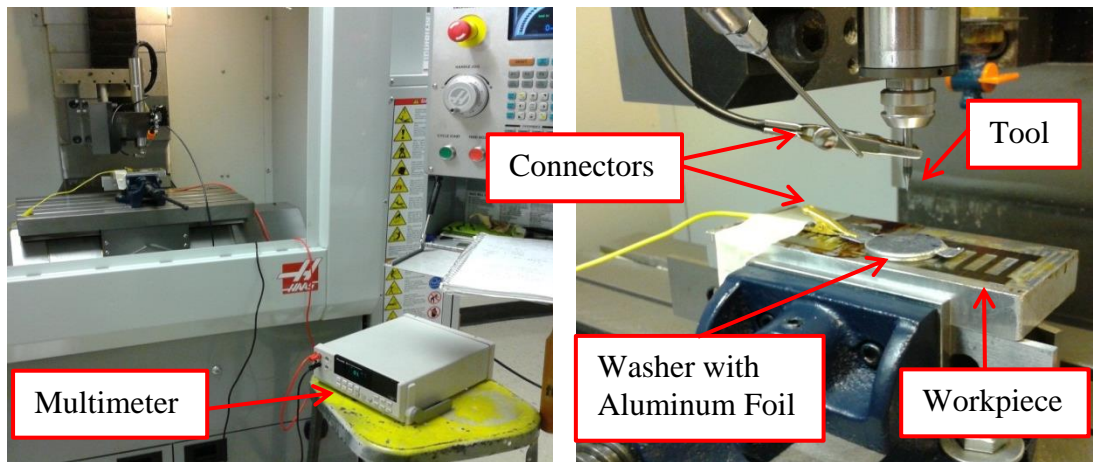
Setup for the Setting Z Offset of Microtool using Multimeter.
